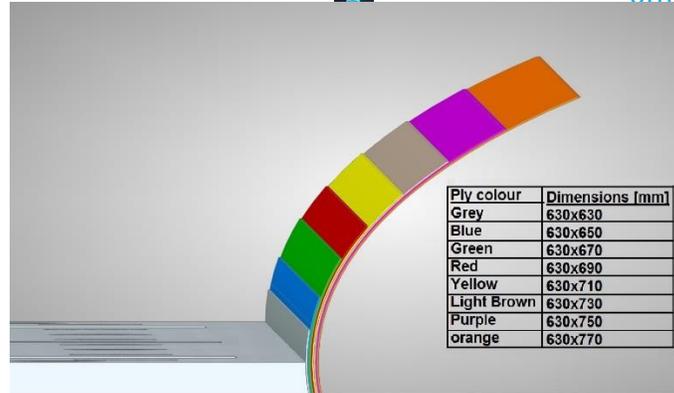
Each set of 8 prepreg plies placed on each half-mould prior to closing the mould and vacuum bag assembly
